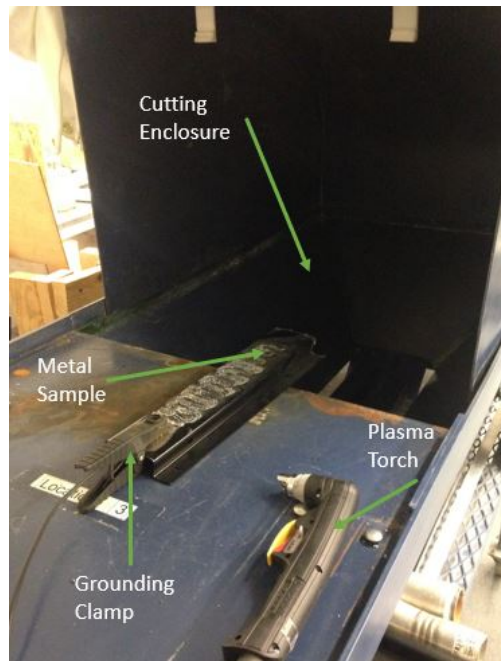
Photo of plasma torch cutting enclosure.
